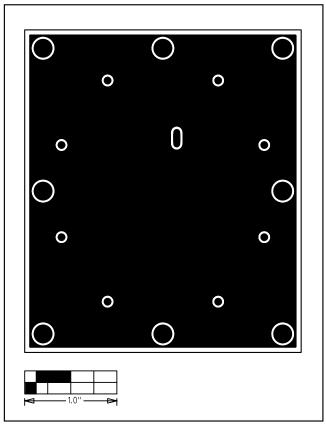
MAX9589 EV Kit PCB Layout—Solder Side
